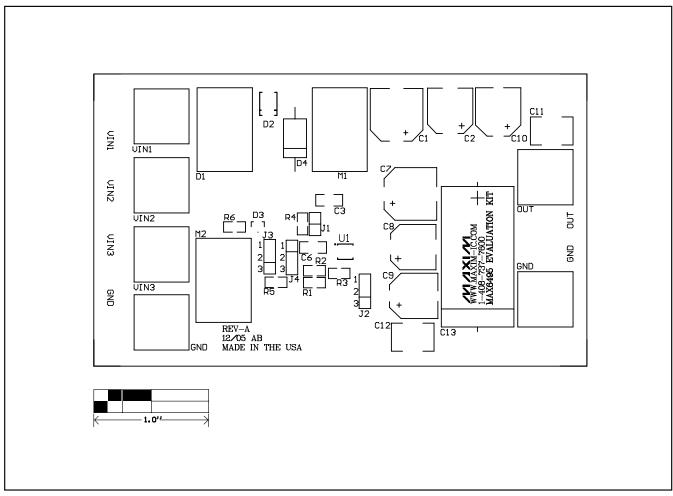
MAX6495 EV Kit Component Placement Guide—Component Side
